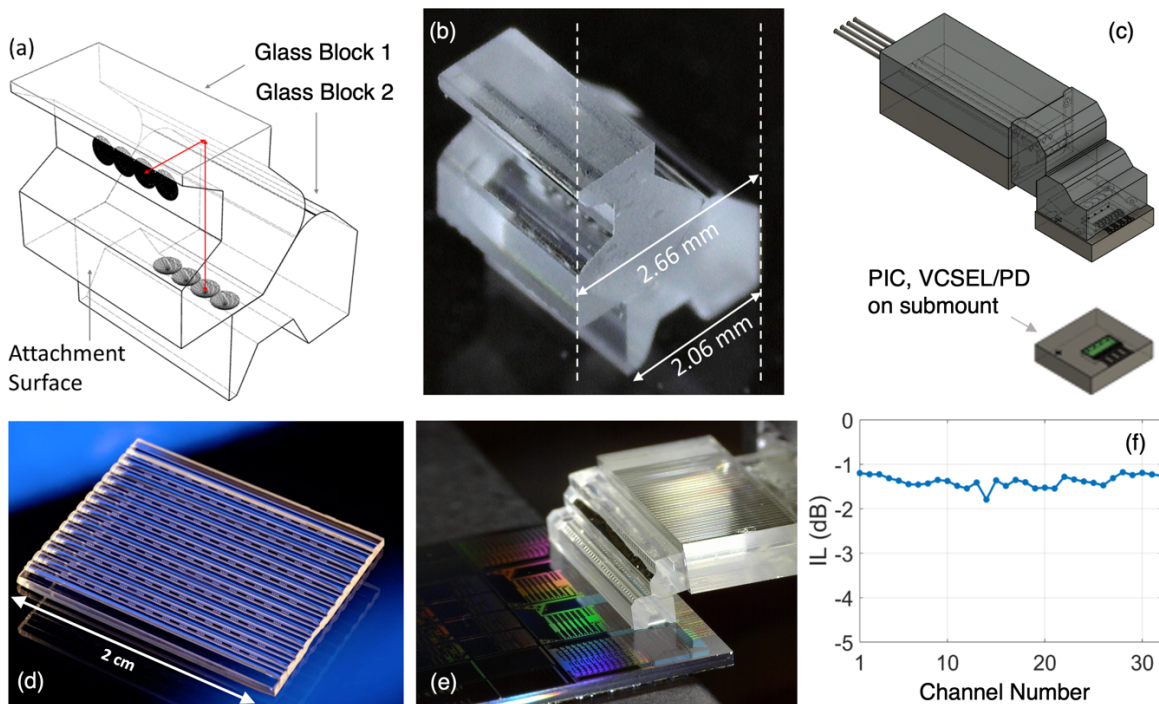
Glass molded micro-optical interposers for fiber coupling of PICs with surface emitting/receiving optical interfaces. (a) Schematic representation of a four-channel interposer formed by the assembly of two molded glass pieces. (b) Assembled interposer with labeled dimensions and (c) diagram of a complete assembly with FAU and PIC or submount. (d) Molded 1" glass plate with 144 groups of 4 lenses. A fully populated mold fits twice that number of arrays. (e) Interposer with 32 parallel channels and (f) measured insertion losses (SM-fiber to SM-fiber).
